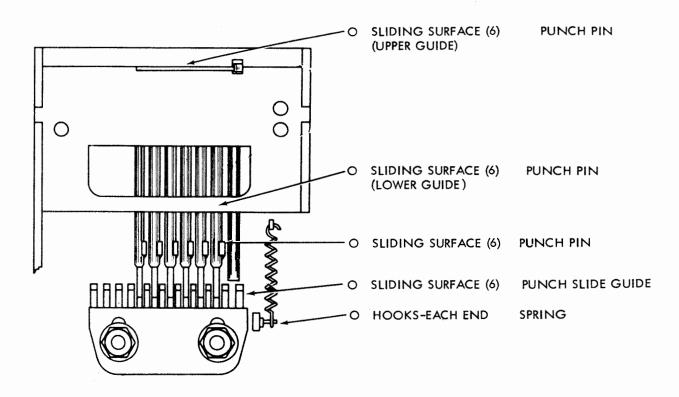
A. TYPING REPERFORATOR TT-373/UG, AND TT-375/UG LUBRICATION - PERFORATOR MECHANISM
